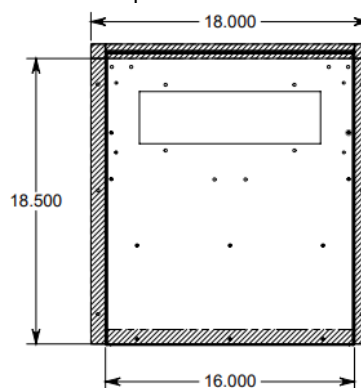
PLENUM ALIGNMENT SCREWS
